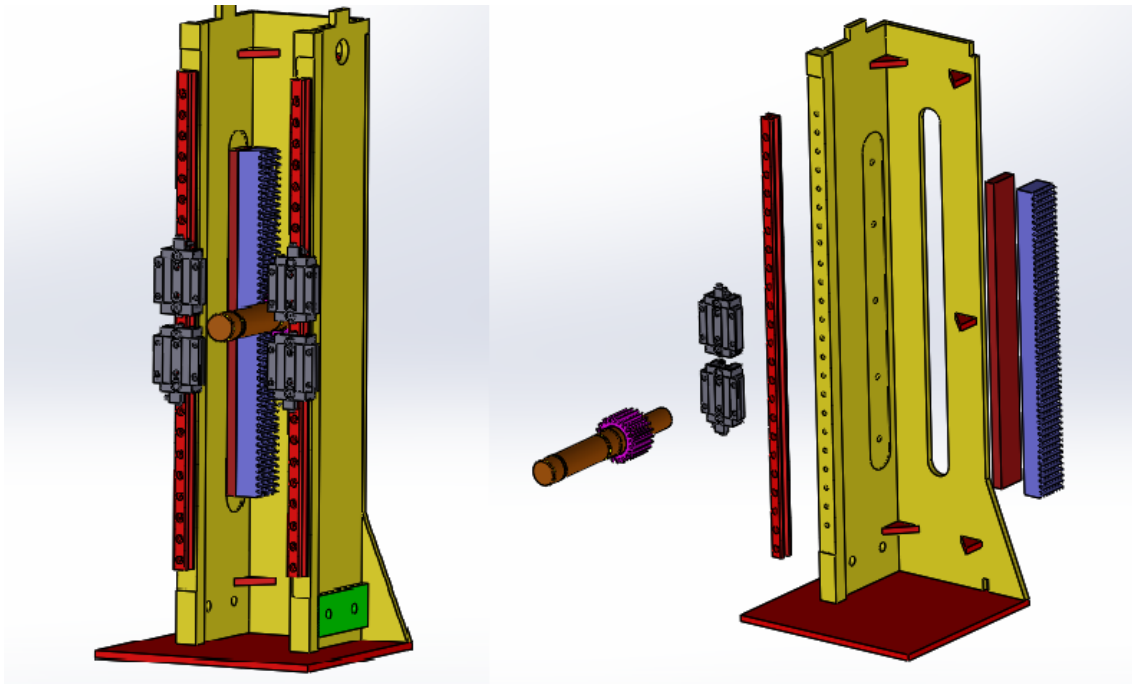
Bigger column with rack, pinion and guiding system.
